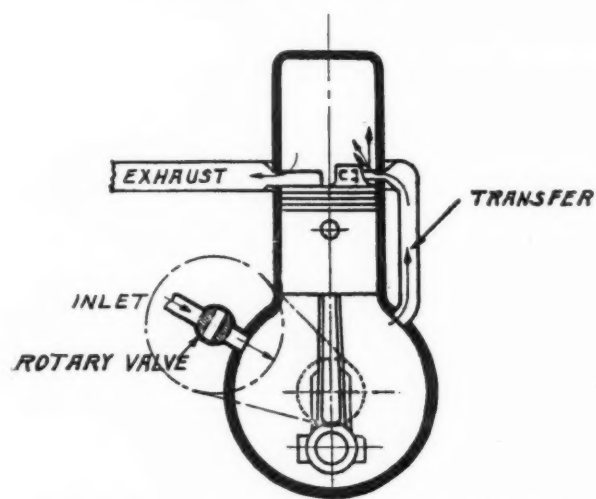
Two-port engine fitted with rotary type of inlet valve on the crank chamber
